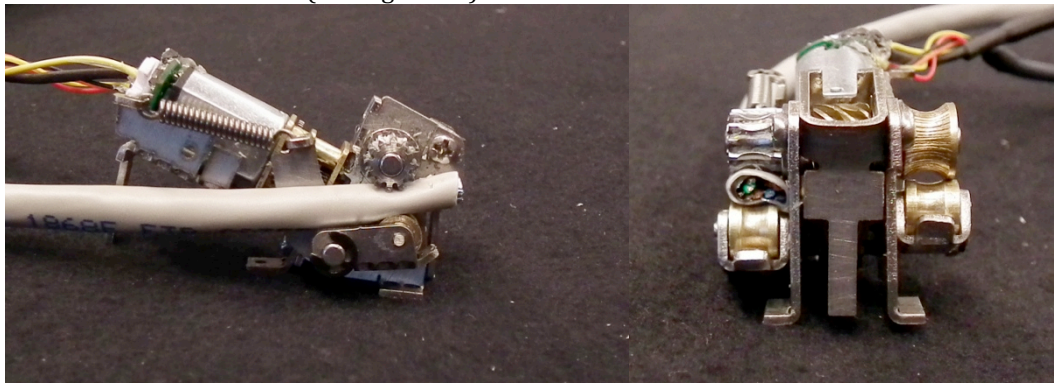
Deformation of the FTP cable caused by the force provided by the spring and roller mechanism. In the right picture the two different types of pulleys can be seen, left a modified steel gear and right a brass pulley with grooves.
